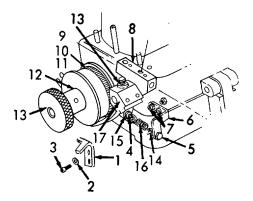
Belt Finger Holder Cushion Spring Holder, Installation.
